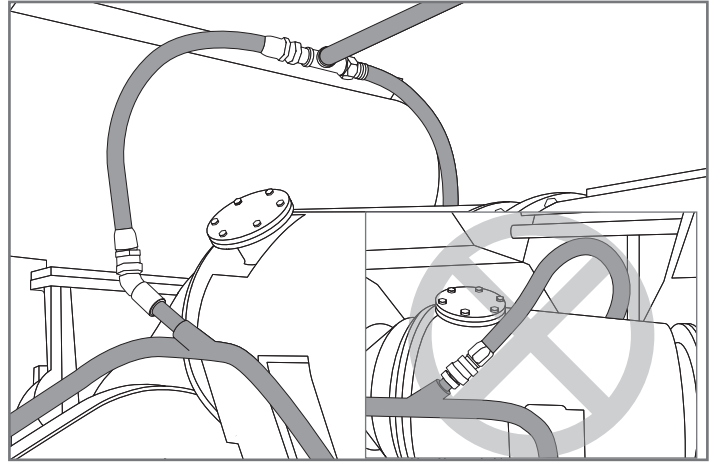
Typical coolant discharge ports installed on a turbocharged engine. The return line is split into two ports, installed at a welded 45° fitting to ensure majority of heated coolant is transferred to engine. Note incorrectly oriented fitting (inset). This fitting must be angled in the opposite direction to allow proper flow.
